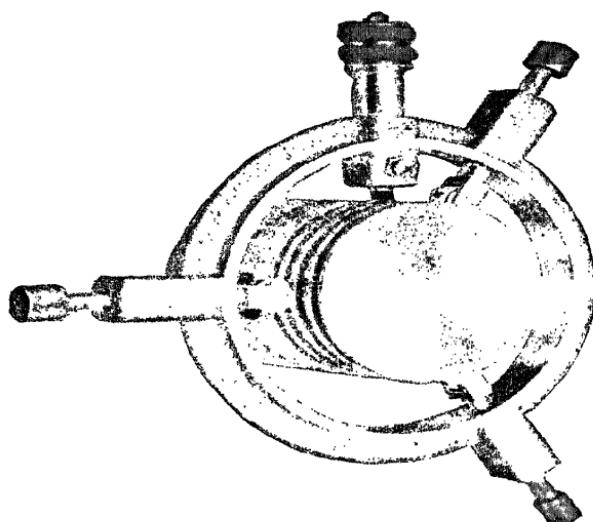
Tool for Squaring-Up Piston-Ring Grooves
